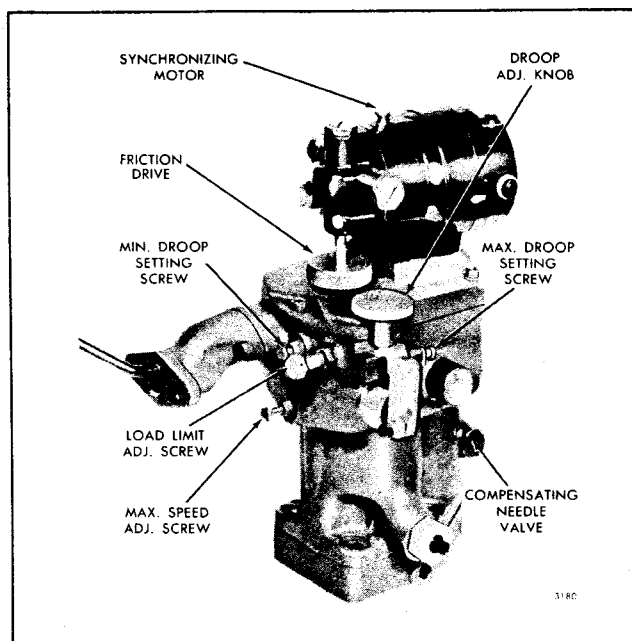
Typical Synchronizing Motor Mounting and Drive Assembly
